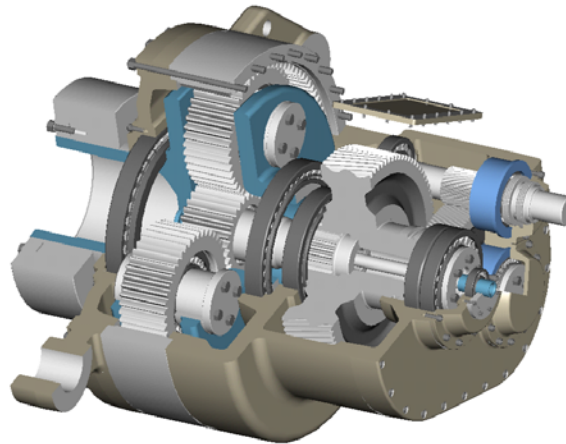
Configuration of a typical three-stage gearbox for wind turbine applications [58]
